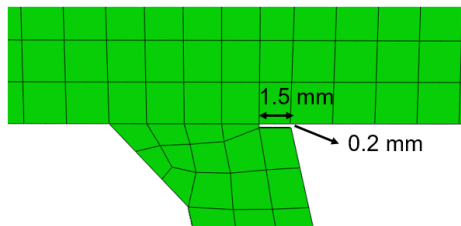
Geometry weld with 75% weld penetration ratio
